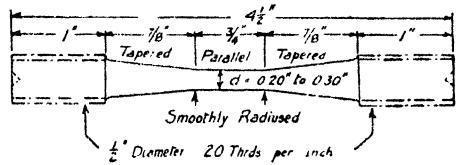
SPECIMEN FOR HAIGH ALTERNATING STRESS-TESTING MACHINE
